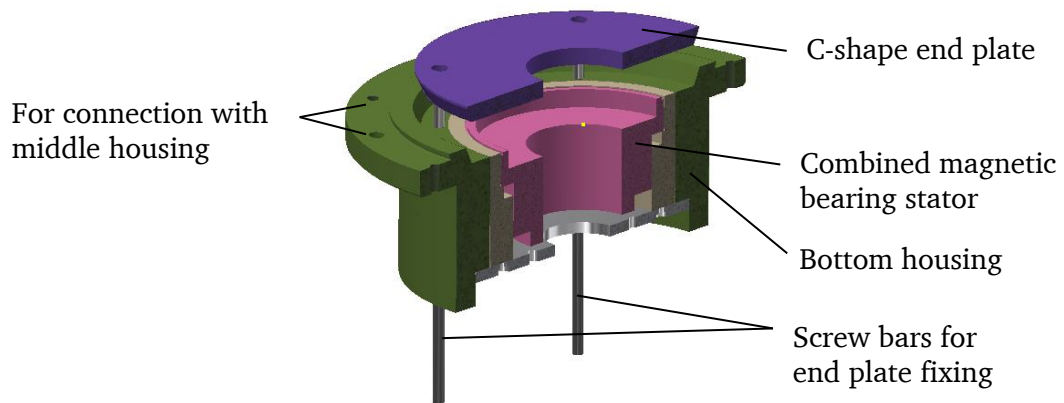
Bottom housing (*Autodesk Inventor 2018*) [47]
